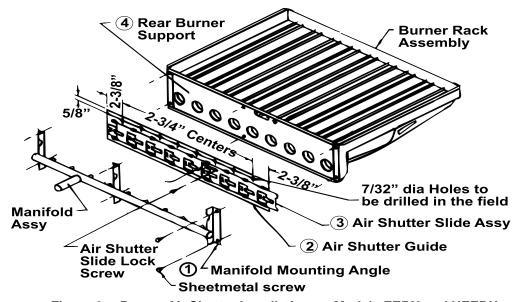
Burner Air Shutter Installation on Models EEDU and HEEDU
